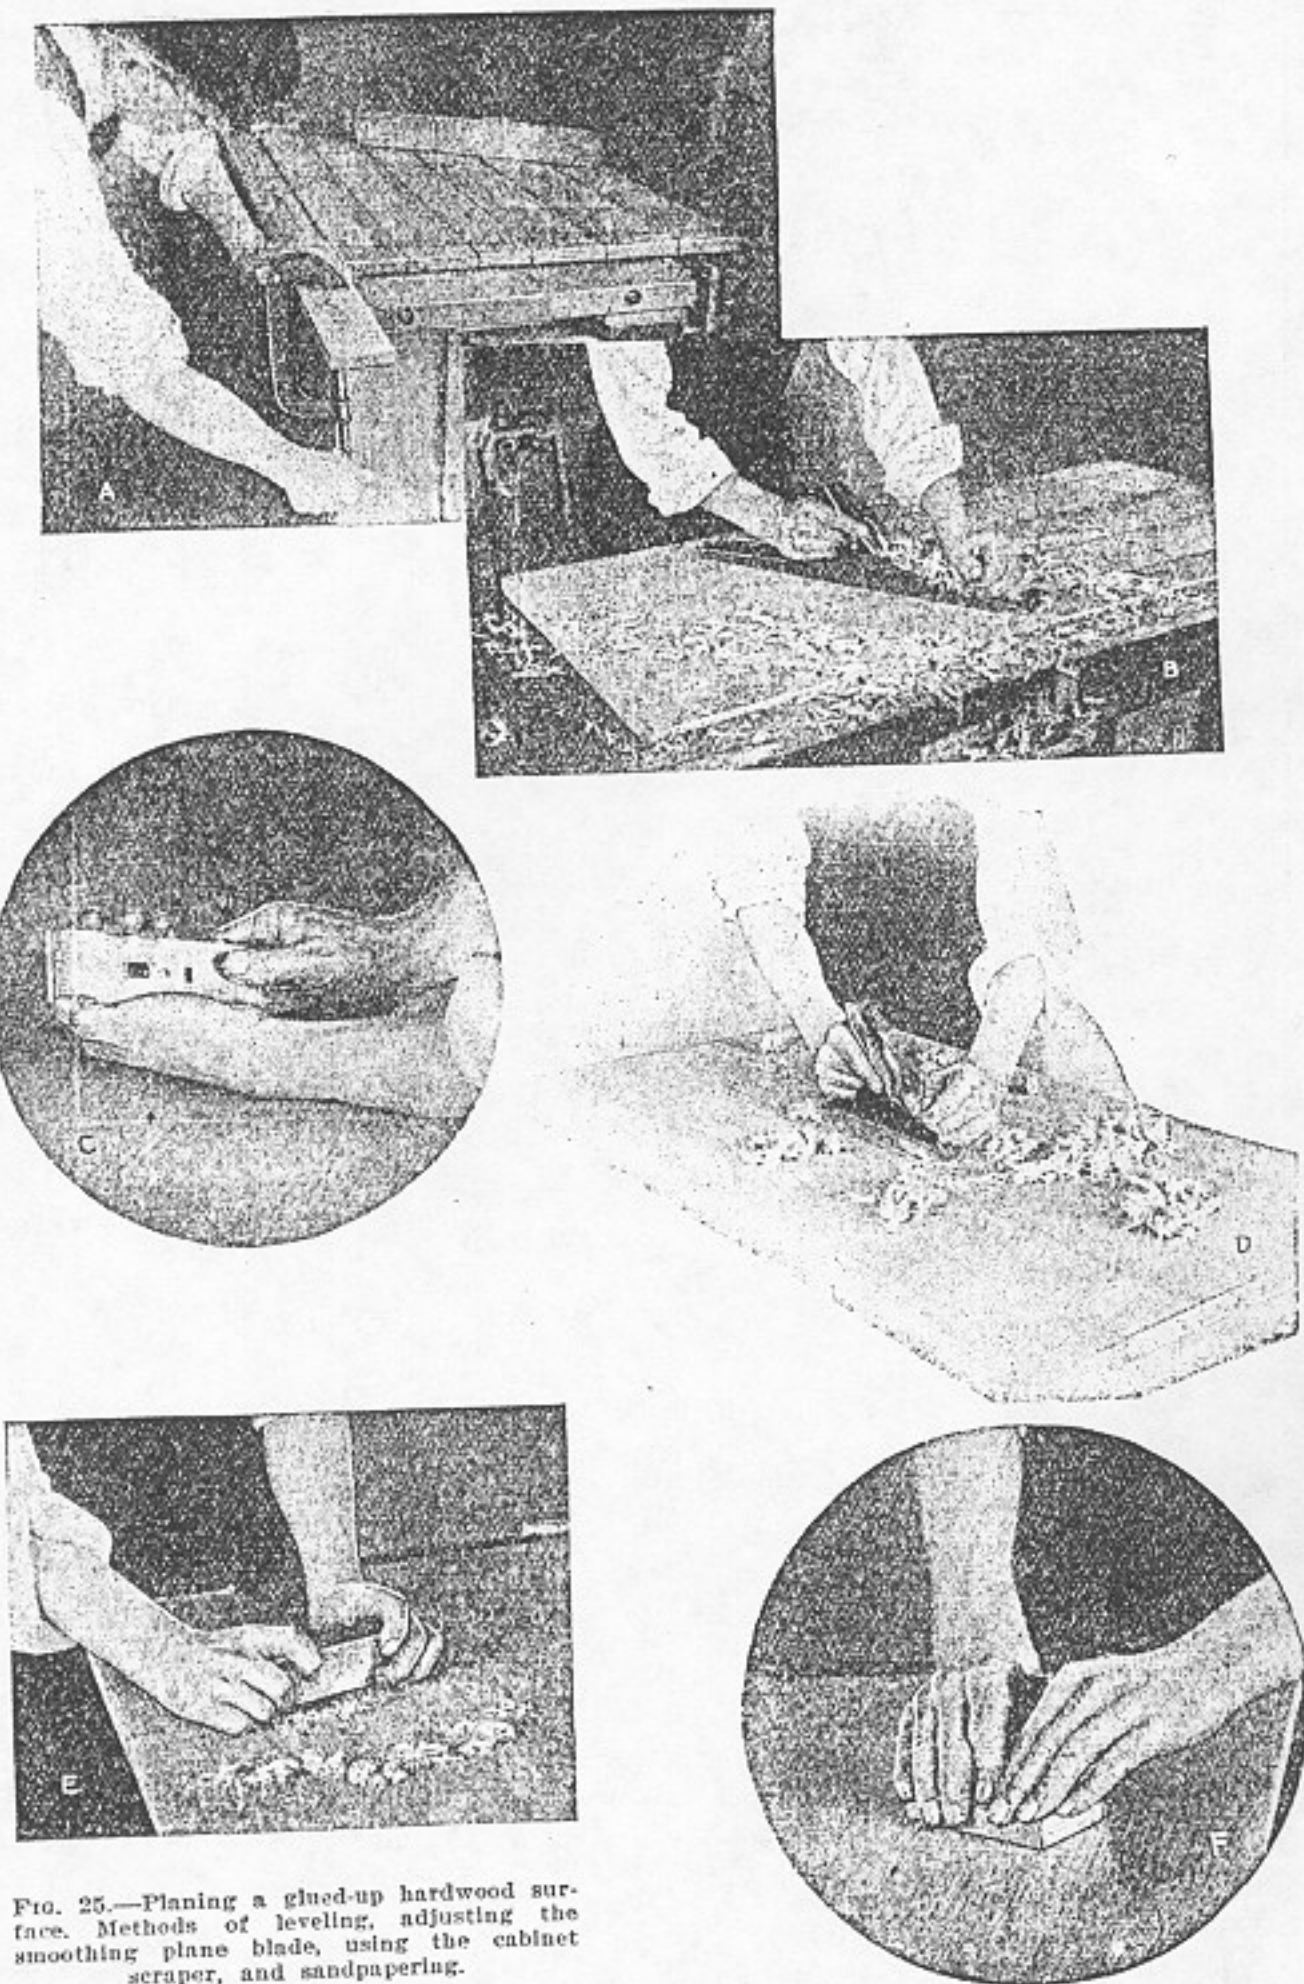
Planing a glued-up hardwood surface. Methods of leveling, adjusting the smoothing plane blade, using the cabinet scraper, and sandpapering.
